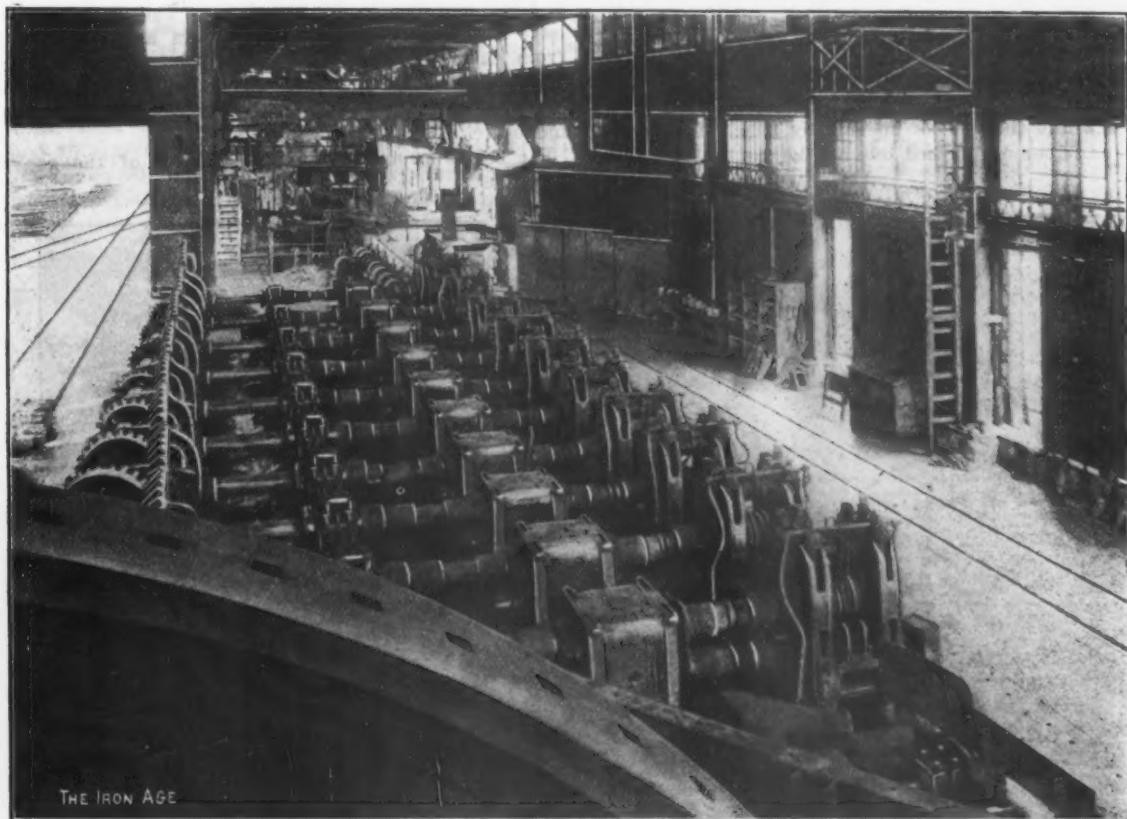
View of 14-Inch Continuous Mill from Lower Gallery of Engine.
